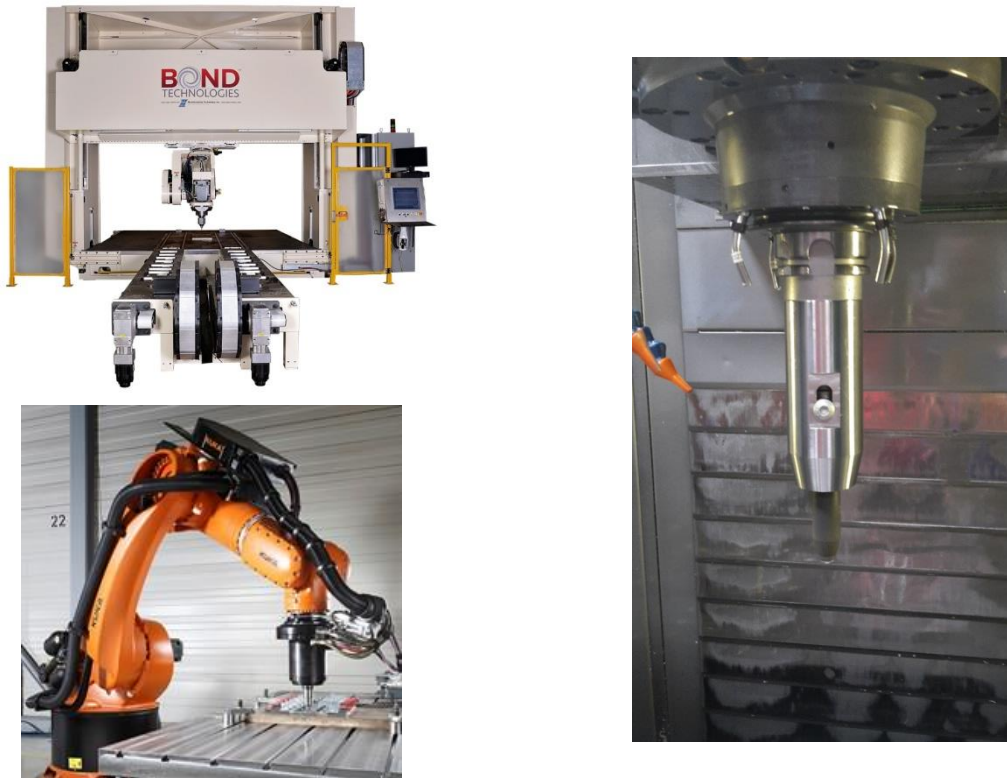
Ball screw driven multi-axis gantry machine for consumer products, industrial FSW robot with spindle system, plug-in force control spindle system with encapsulated telemetric system of a converted and upgraded milling machine for a high degree of process integration, pictures: courtesy of Bond Tech. / TWI / Rapid Technic Switzerland
